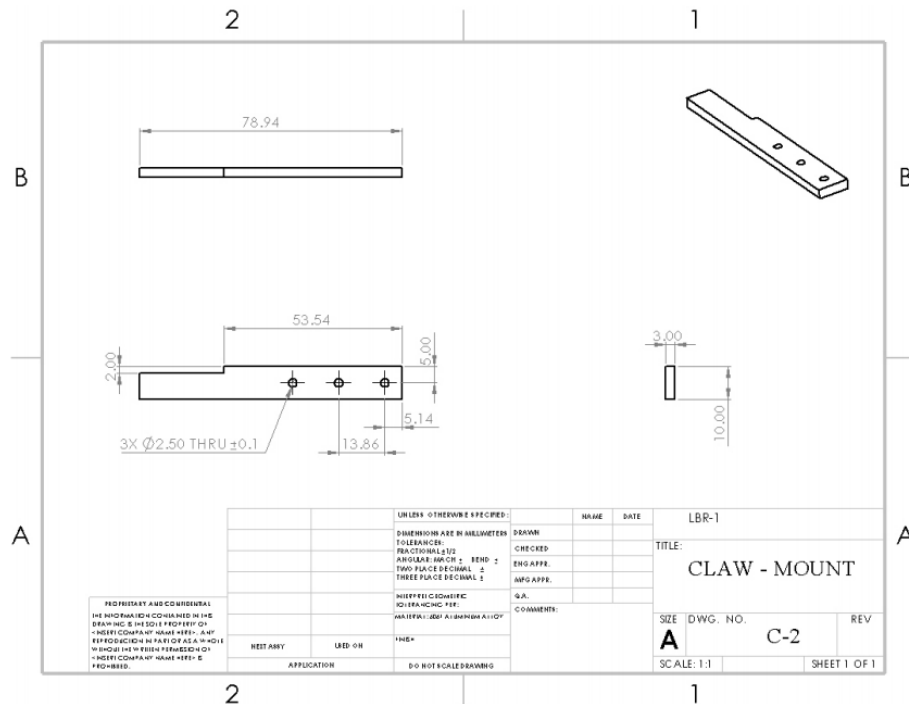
Part drawing of the mount of the claw's hook to be fastened onto the servo.
